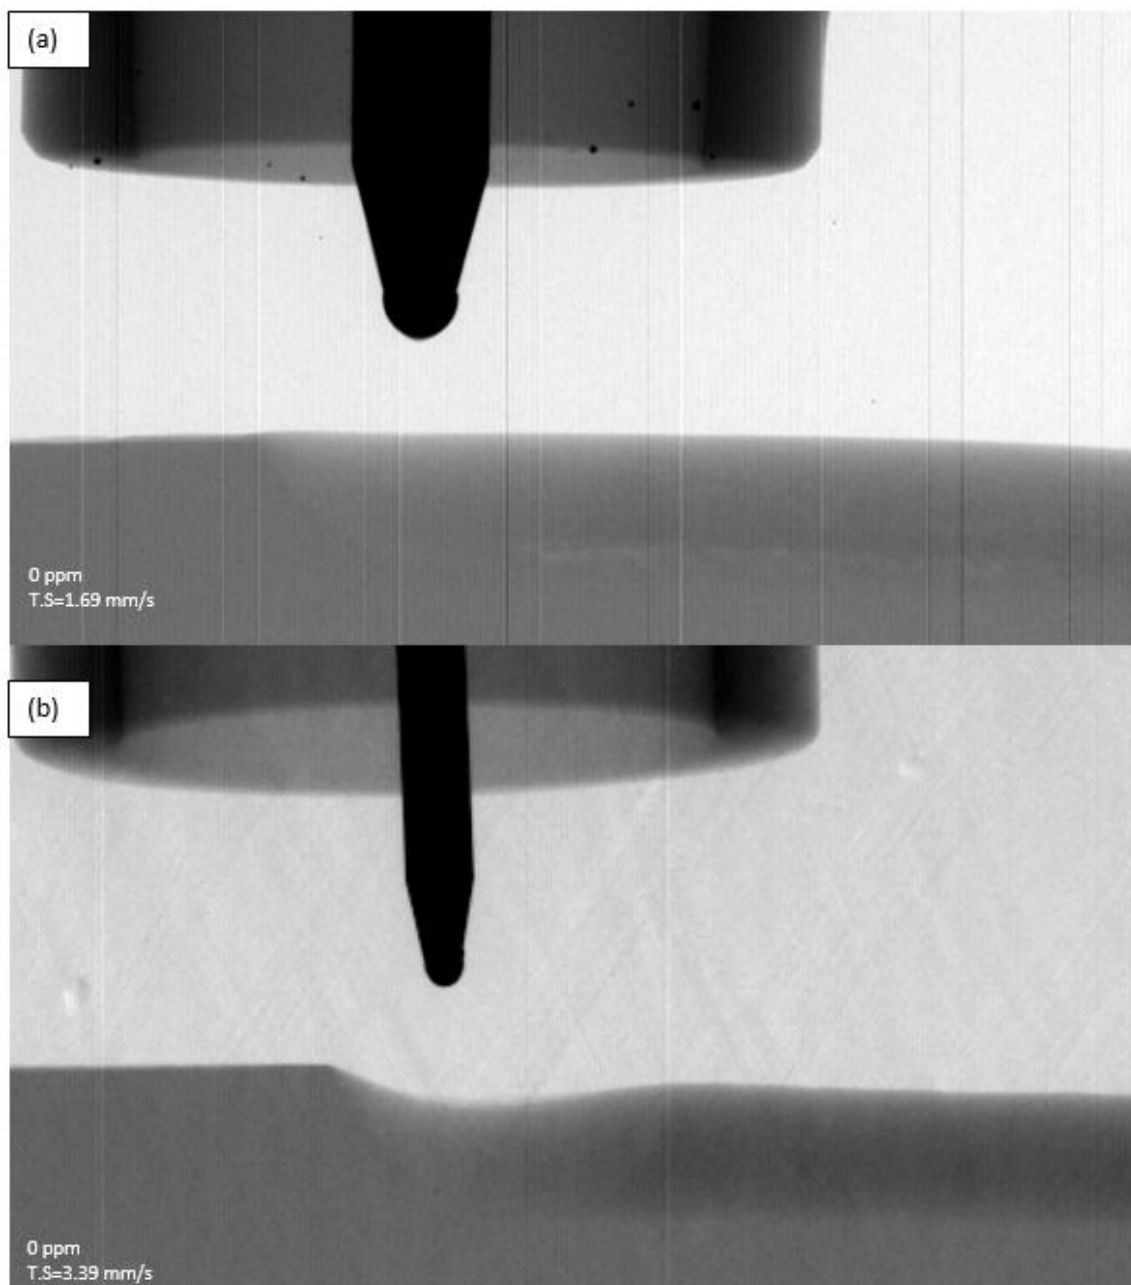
Alloy 1100 welded sample welded with 0 ppm of hydrogen at a) 1.69 mm/s and b) 3.39 mm/s.
